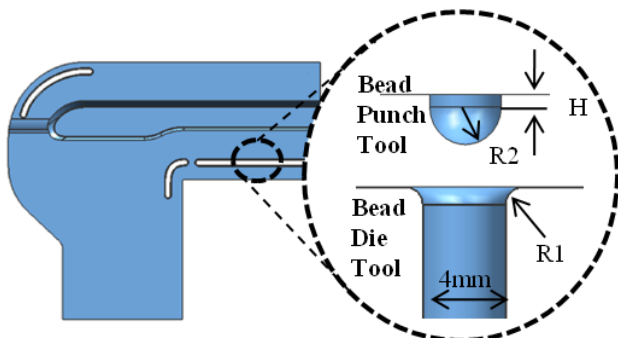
The position of draw bead and bead shape (R1: the radius of bead die tool, R2: the radius of bead punch tool and H : bead height)
